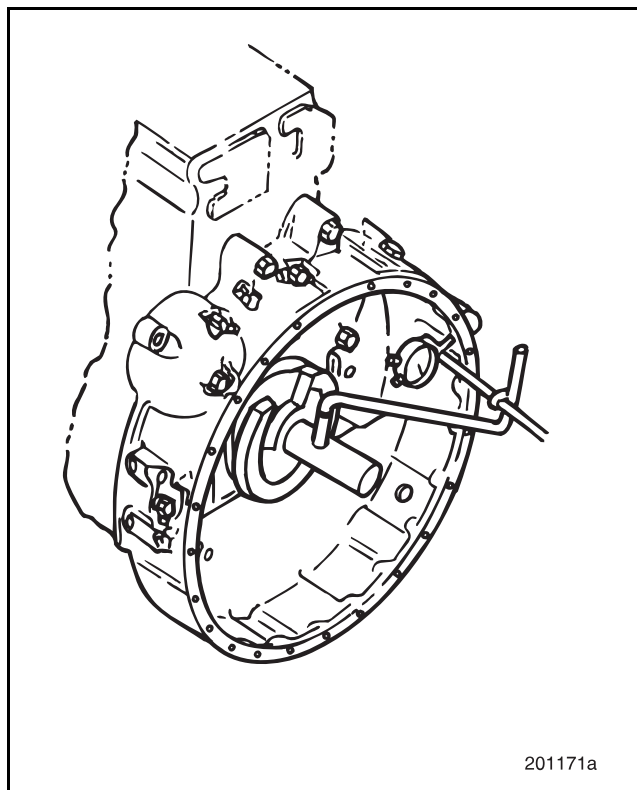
Flywheel Housing Runout Check with Dial Indicator (PT5035) and Z adapter (PT5035-1)
